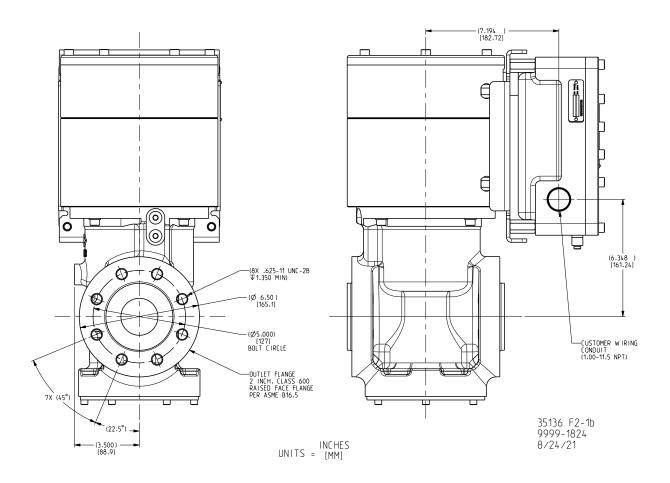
Outline Drawing Stainless Steel GS50 with Conduit Entries
